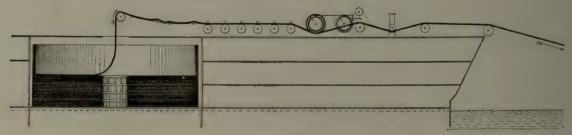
GENERAL ARRANGEMENT OF PAYING-OUT GEAR ON BOARD THE "GREAT EASTERN."
